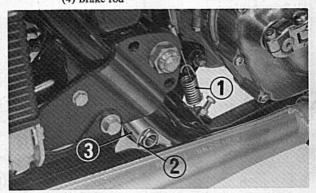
(1) Brake pedal spring (2) Cotter pin (3) Brake pedal
